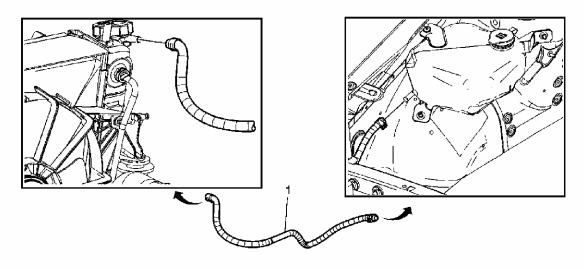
View Of Radiator Vent Inlet Hose Courtesy of GENERAL MOTORS CORP.
